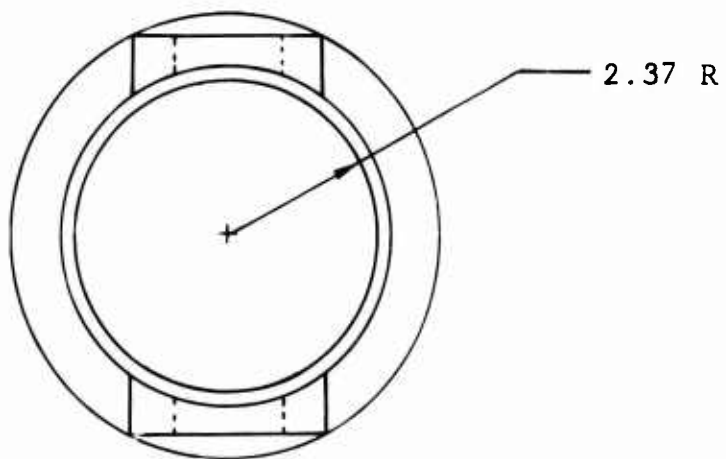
Main Rotor Blade Retention Fitting, Part No. 609-010-105-3.
